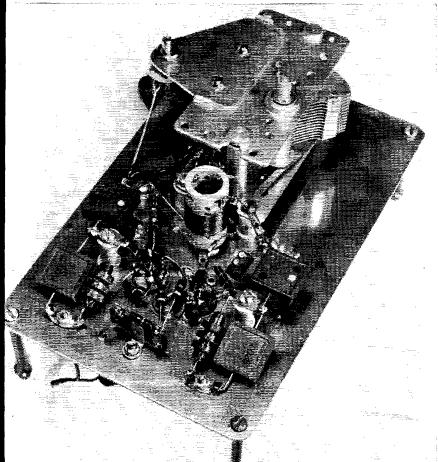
The oscillatordoubler chassis, showing the layout of the push-pull oscillator circuit. Tubes and pushpush output circuit are on other side. The parts arrangement is similar to the circuit layout in Fig. 2. The two tube sockets are between the ceramic pillars, with resistors and disk-ceramic capacitors clustered around them, V2 is at the left in this view. C3 is supported by the triangular plate mounted on the frame of the tuning capacitor, Ct. Ceramic pillars insulate the frame of C1 from the chassis.
